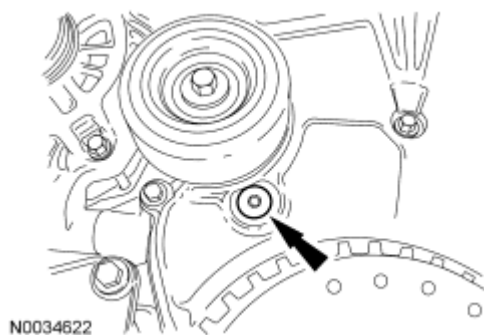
Locating Lower Front Cover Timing Hole Plug
